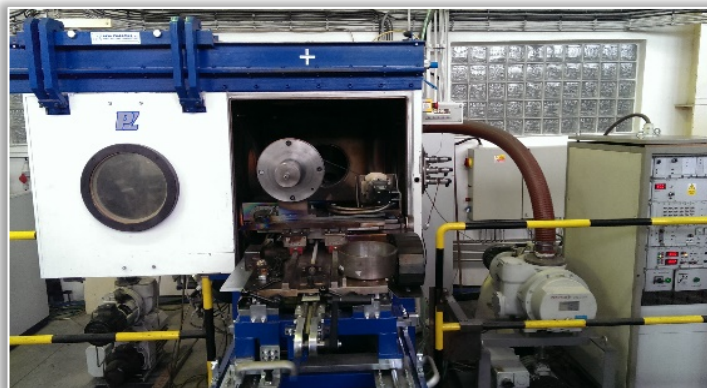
Universal electron beam welder PZ – EZ – ZH3
